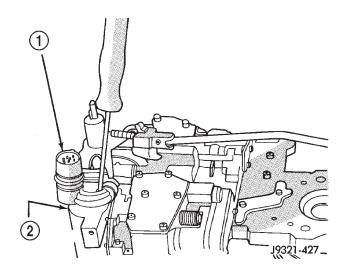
Solenoid Harness Case Connector Shoulder Bolt
